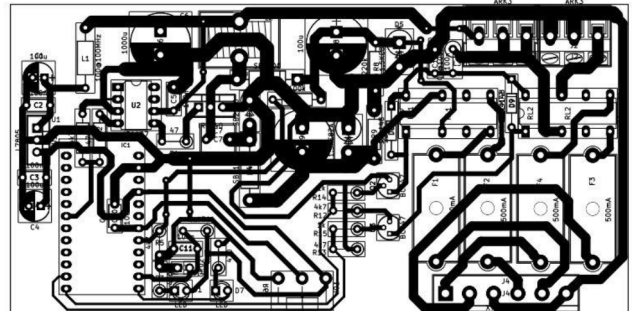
Designed PCB allowing the pulser to operate on ±90V range.
